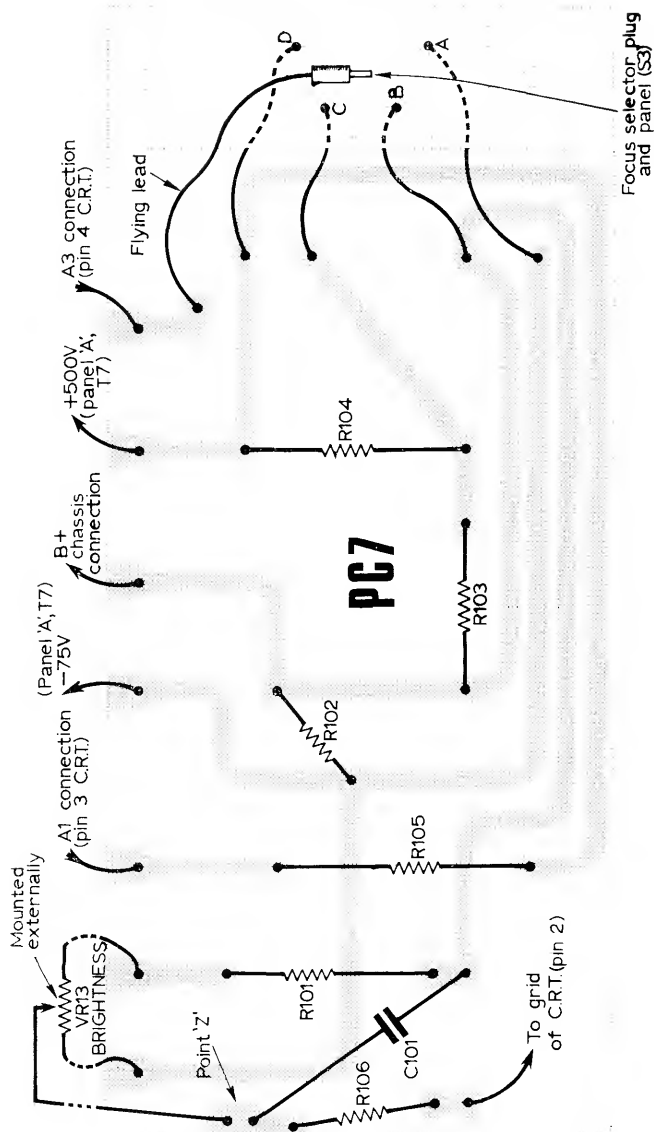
The printed board of the c.r.t. control unit (PC7). The copper parts are shown shaded.
